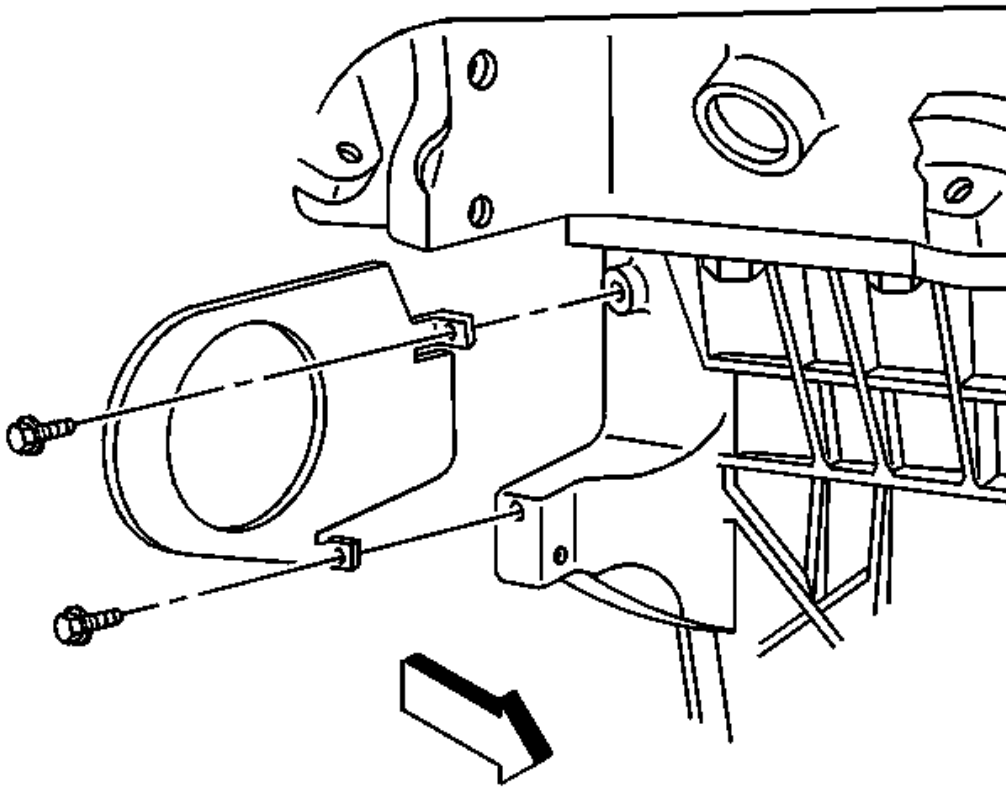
Locating Oil Cooler Pipes Bracket Retaining Bolt
